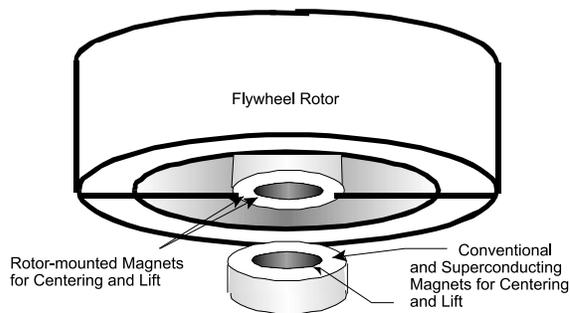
Schematic of Boeing's Flywheel Assembly.
